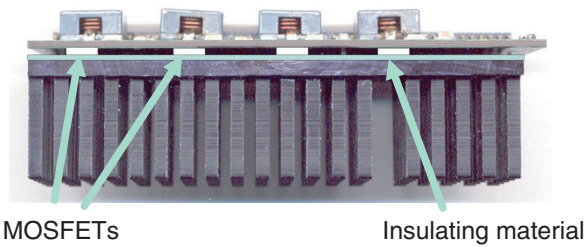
VRM profile showing how the heatsink is mounted on the PCB
